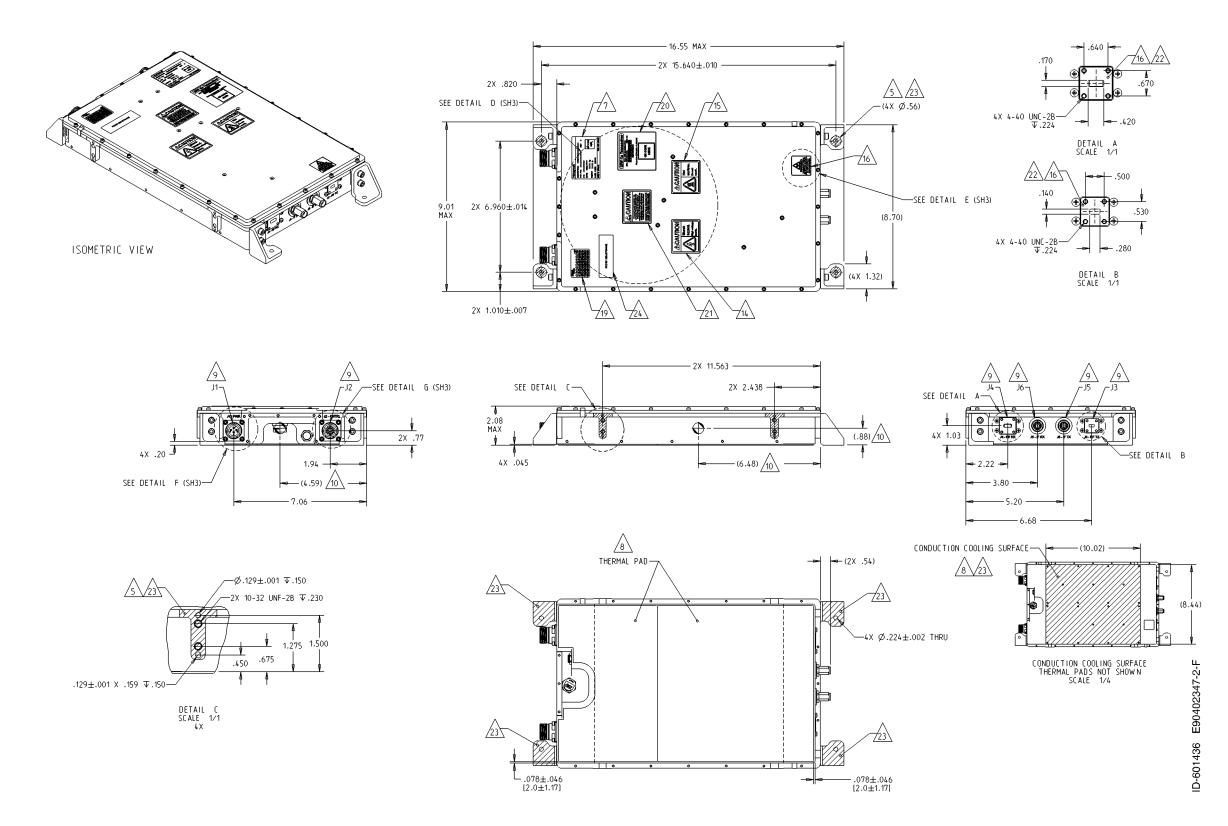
(Sheet 2 of 3) KRFU, Conduction-Cooled 2, Outline and Installation Drawing (90402347, REV F)
